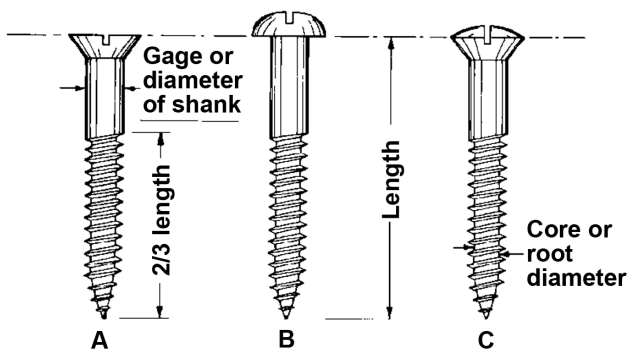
Common types of wood screws: A, flathead; B, roundhead; and C, ovalhead.
